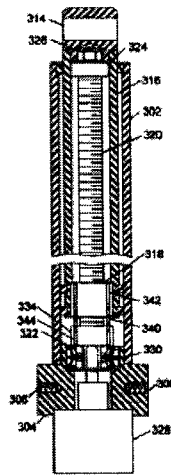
Embodiment of Boydstun’s Innovative Screw Actuator
